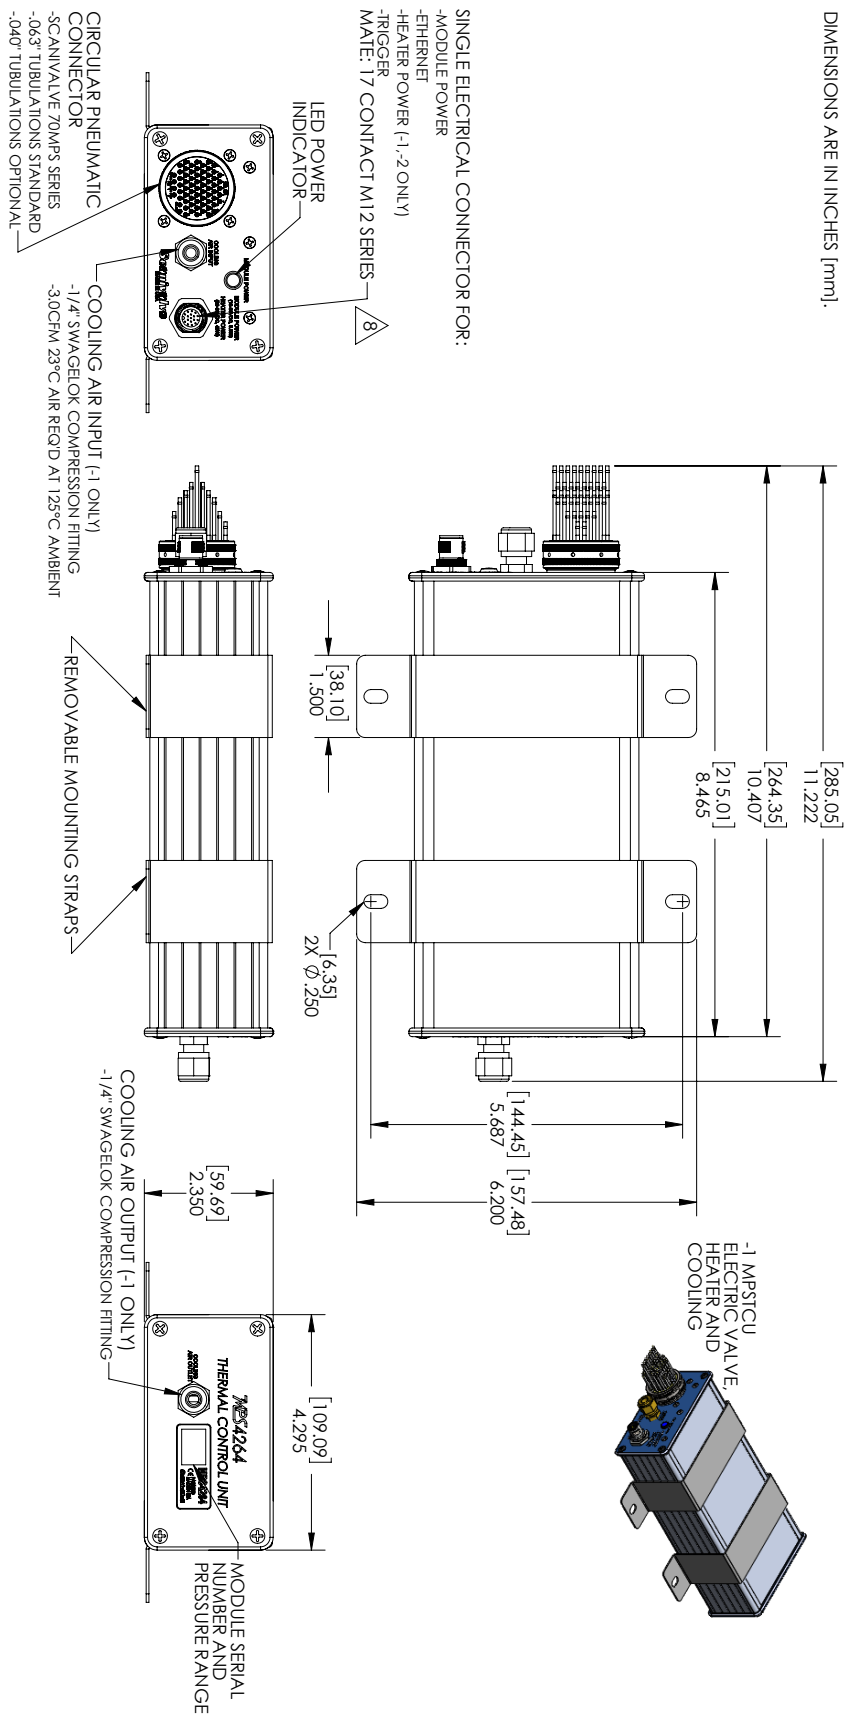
MPS4264TCU EPX DIMENSIONAL DRAWING
